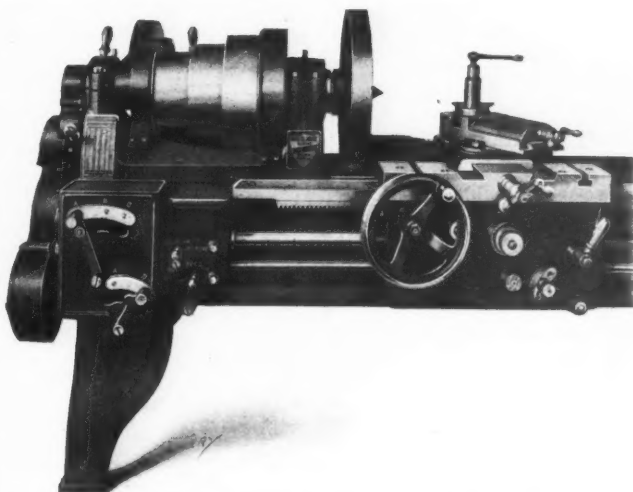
"Roulsted" Engine Lathe equipped with Compound Rest
